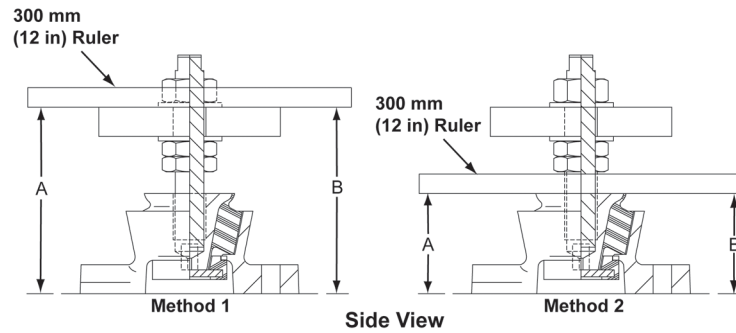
Method 1 and Method 2 - Side View of Isolator
